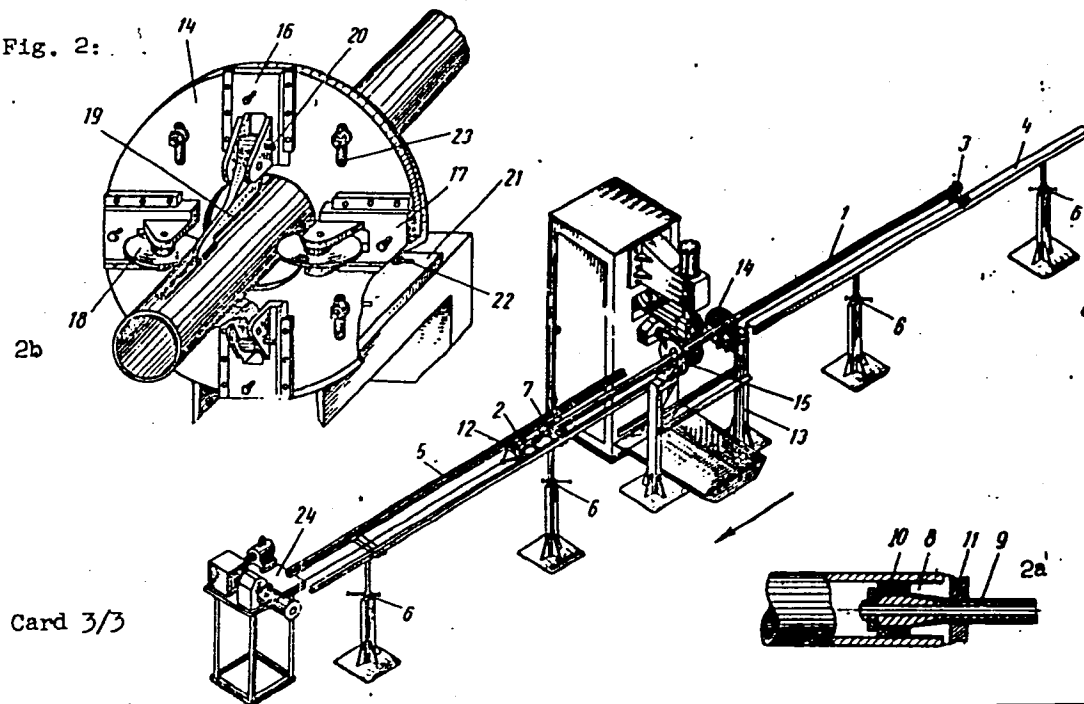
Schematic diagram of a unit for welding fins on pipes (Welding direction indicated by an arrow) X
